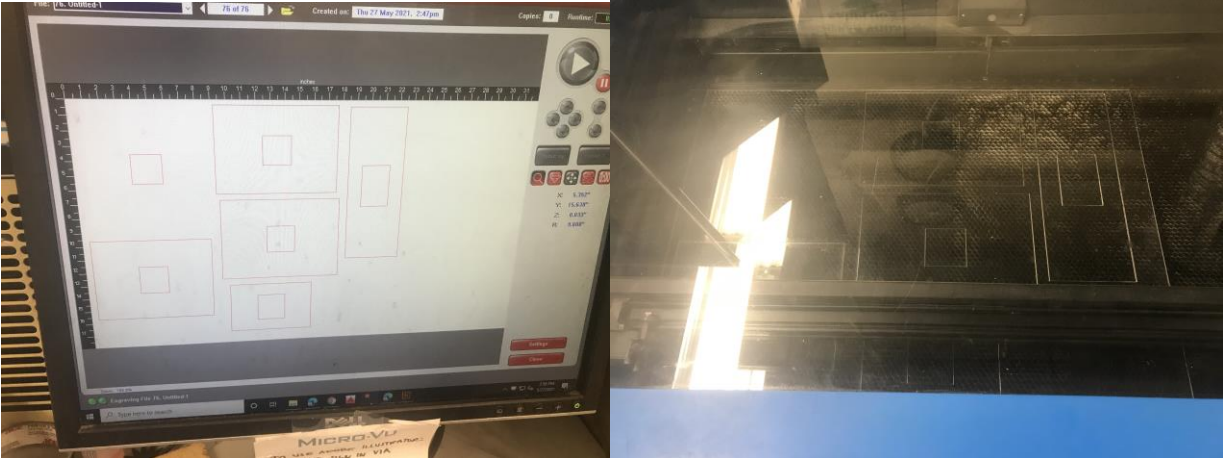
Process of Laser Cutting Acrylic: A) Laser cutting software that outlines cuts that will be made on the acrylic piece. B) Physical cuts on the acrylic sheet made in the printer.
